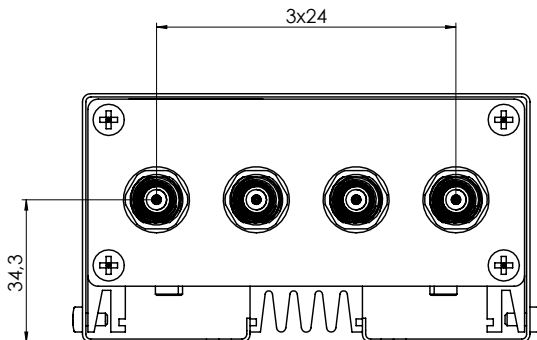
For deviating dimensions for hardware version 2.0 or higher in millimeters
